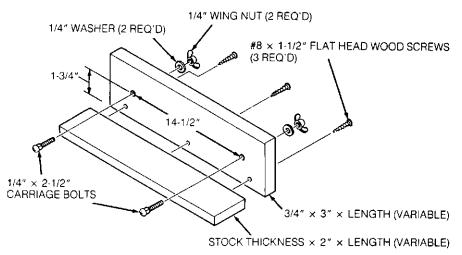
Construction details of a spacing fixture that is used when ripping stock less than 1-1/2" wide.
